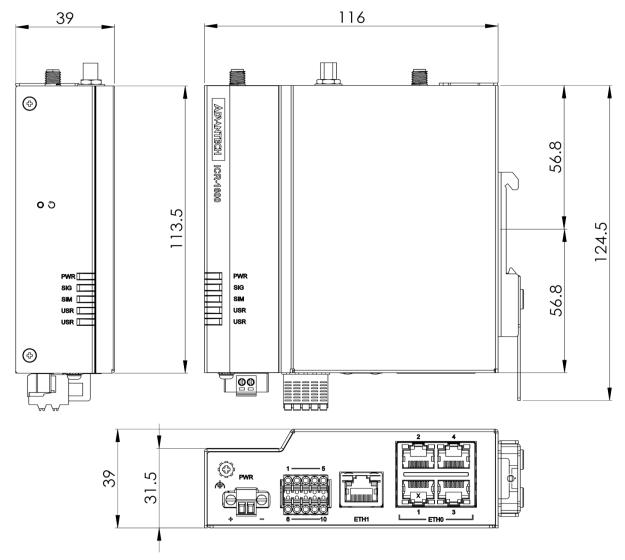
Router Dimensions - Front, Top and Right view with DIN holder
